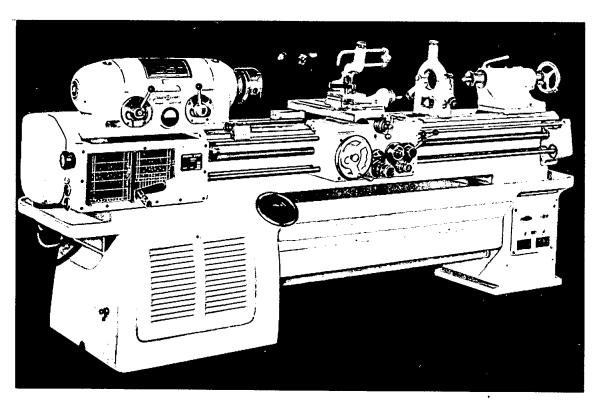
Rumania: Engine Lathe of Czechoslovak Design Being Produced in Rumania
